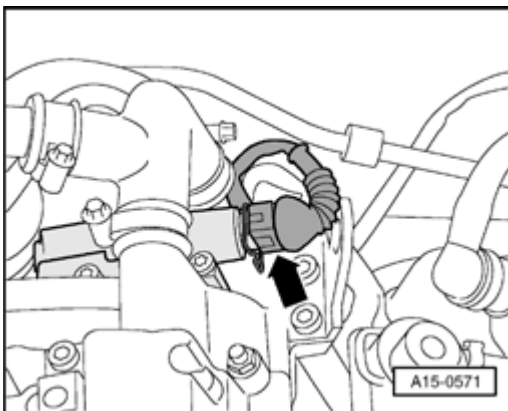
Disconnecting Connector At Camshaft Adjuster
